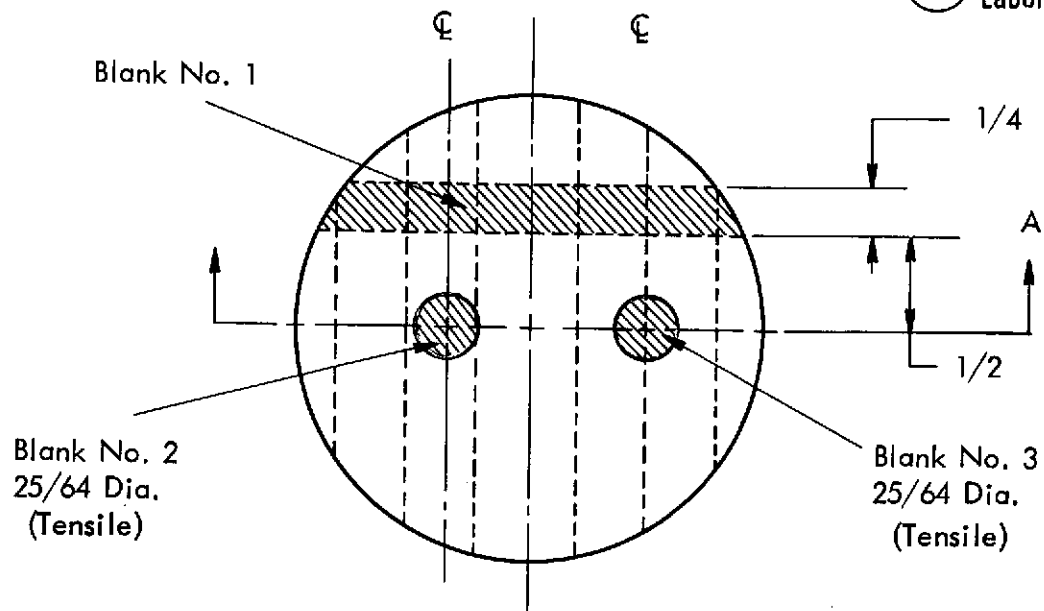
Geometric Orientation of Bend Coupons Machined from Simple, Flat-Faced Specimen. Transverse Section Through Welded Specimen is Portrayed.
